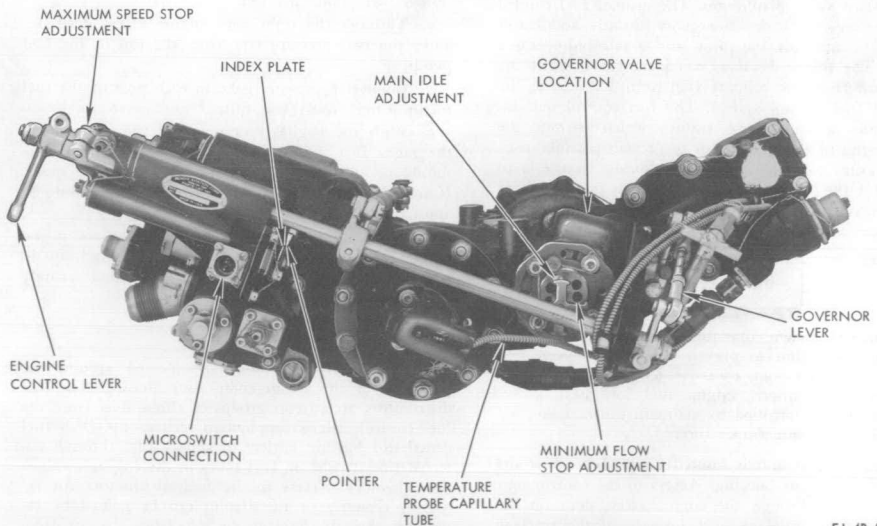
Engine Fuel Control Unit (Sheet 2)
